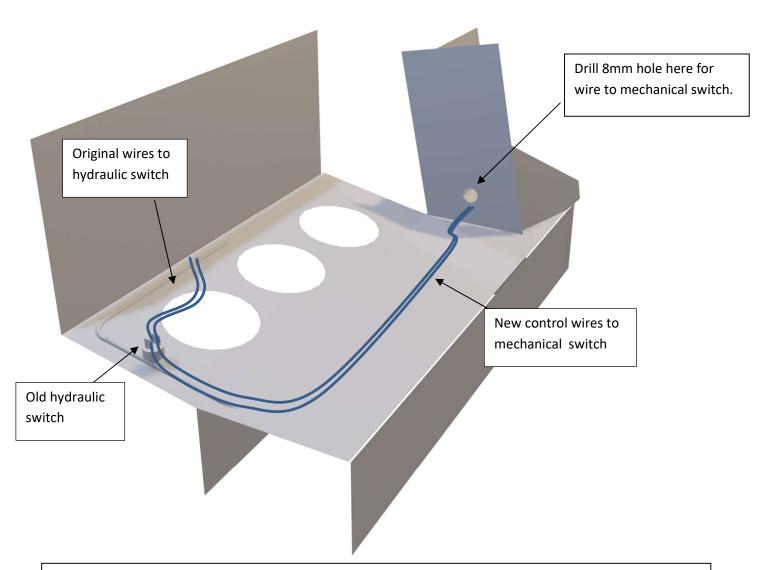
View of RH Engine bay floor showing location of original hydraulic brake light switch and electrical connections
